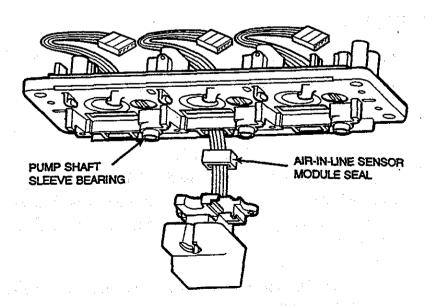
Machined Aluminum Chassis (Model 2860 only)
